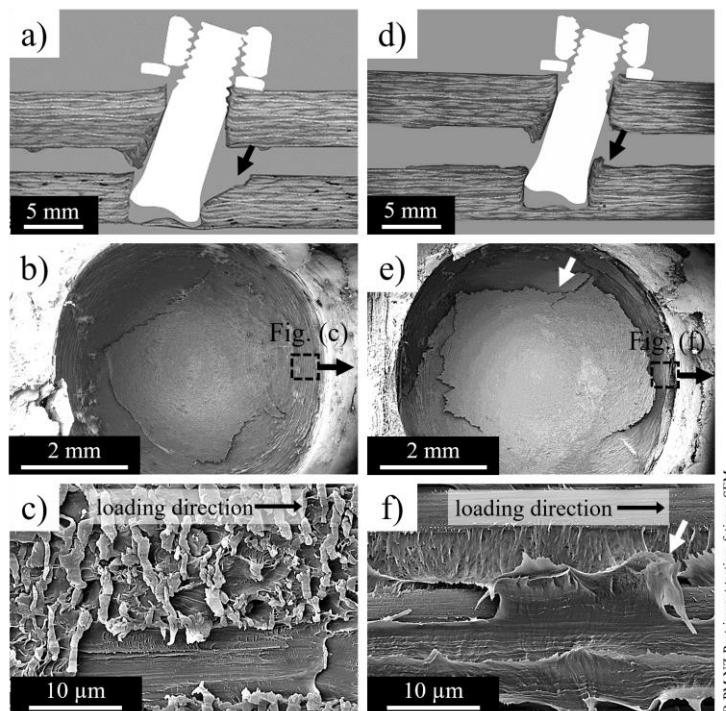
Typical cross-section of failed friction riveted joint, impacted with a) 5 J, and b) 20 J; overview of composite hole from c) 5 J, and d) 20 J impacted joints; microstructure of the squeezed material from e) 5 J, and f) 20 J impacted joints, highlighting shear-induced hackles and tearing of fibrils, respectively.
